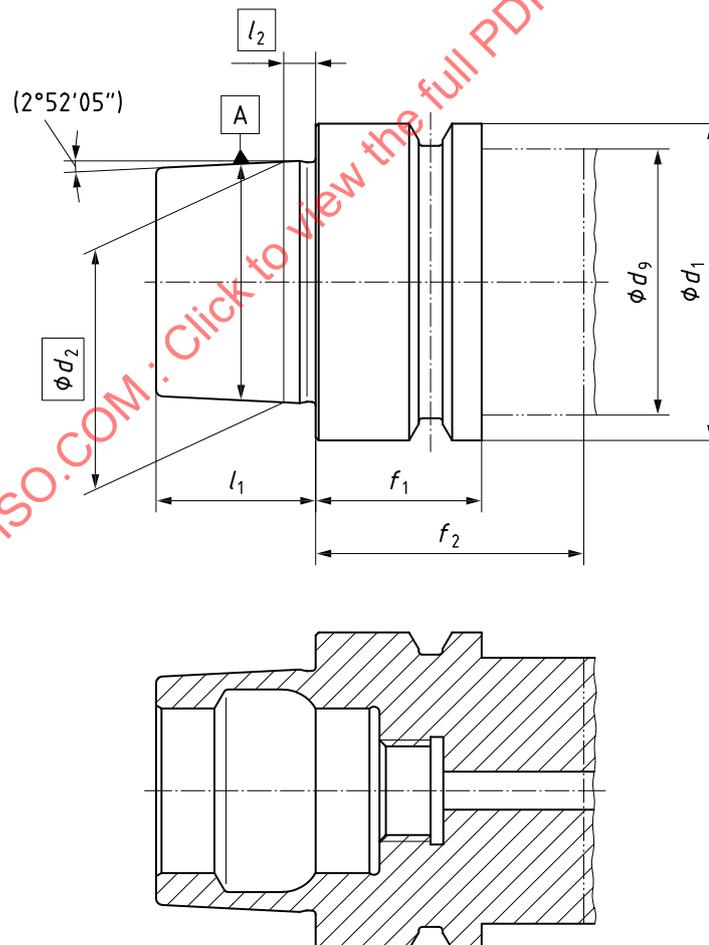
Hollow taper shank of type CB4.4 Hollow taper shank of type EB
